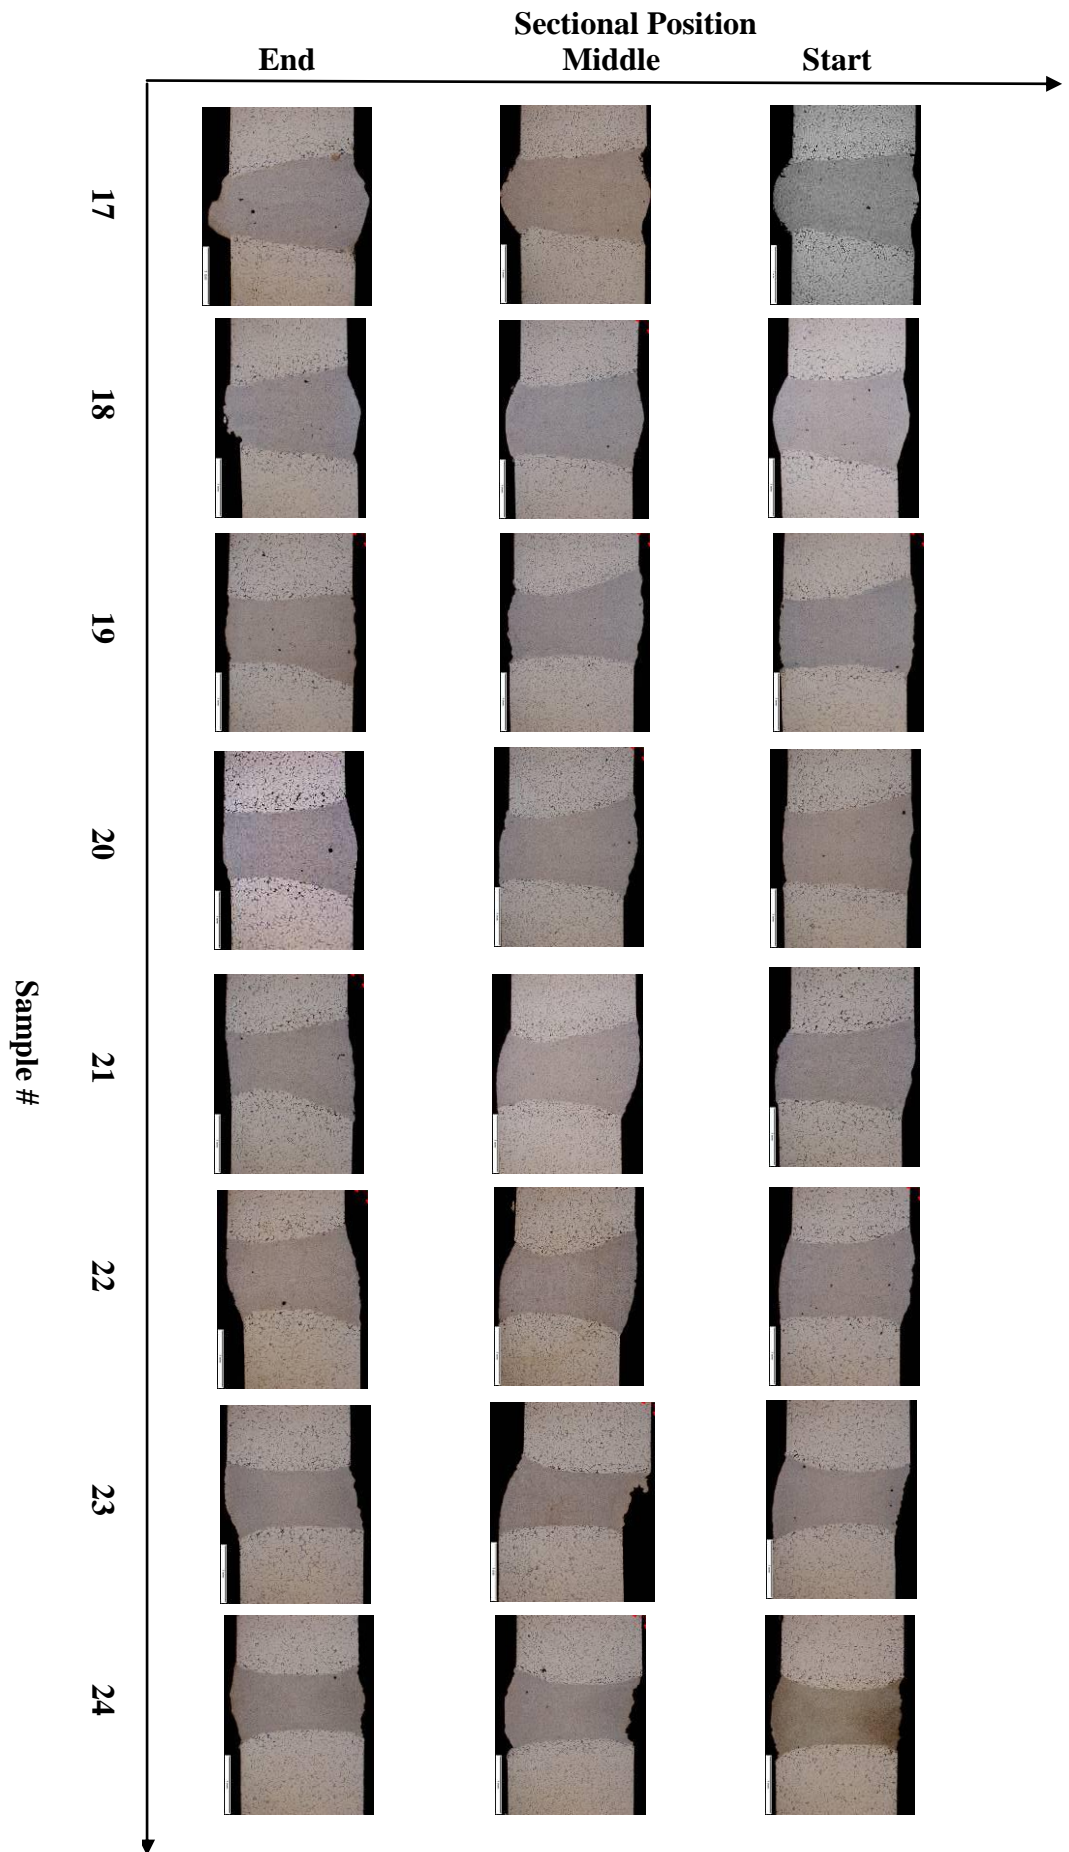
repeatability of Laser Welding Process for 2 mm Plate
